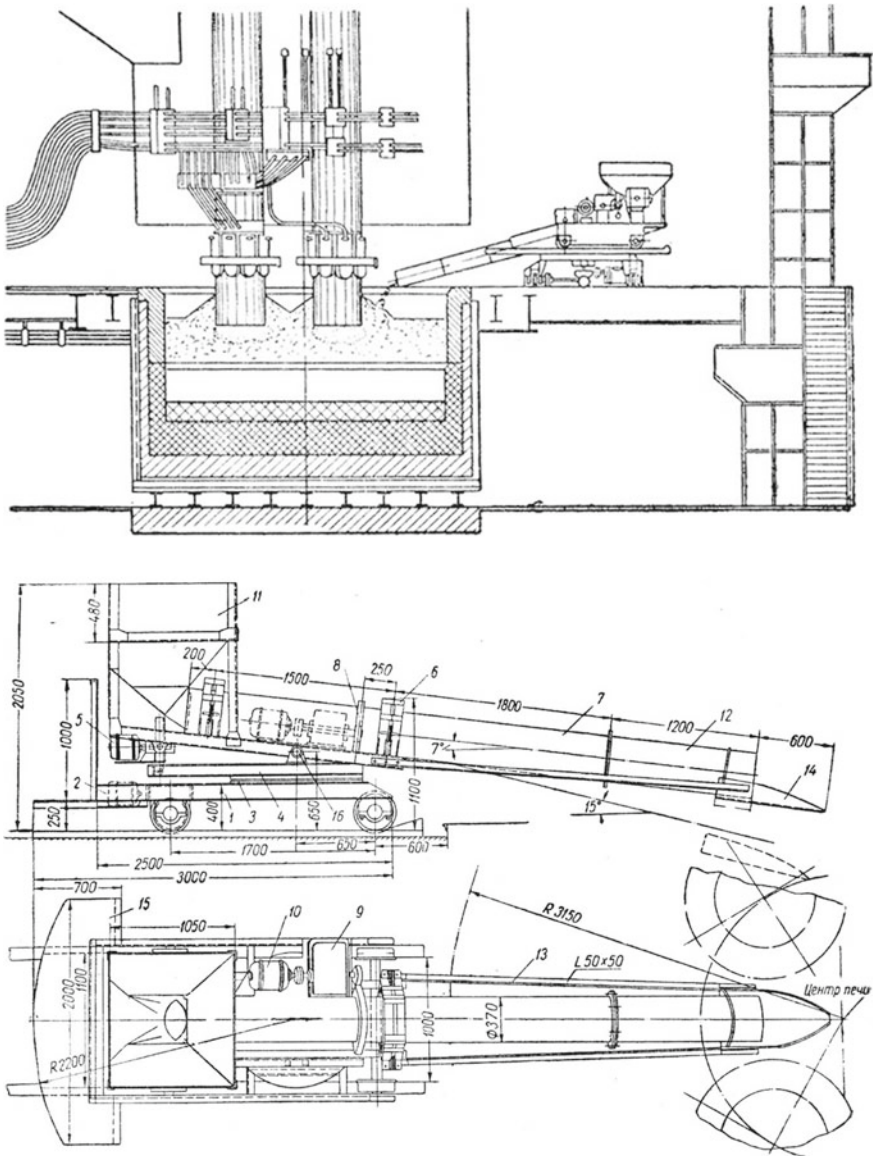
Rotating tube-loading machine, 1—trolley frame; 2—electric motor and gear reducer; 3—ball bearing; 4—rotary frame; 5—electric motor and pipe swing mechanism; 6—pipe support; 7—pipes; 8—gear transmission; 9—gearbox rotation mechanism; 10—electric motor; 11—hopper; 12—replaceable end of the pipe; 13—frame for mounting the tray; 14—tray; 15—a platform with a railing; 16—axis of swing
